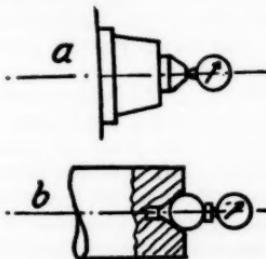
, b.—Axial slip—(a) flattened point (b) ball in centre bearing.
